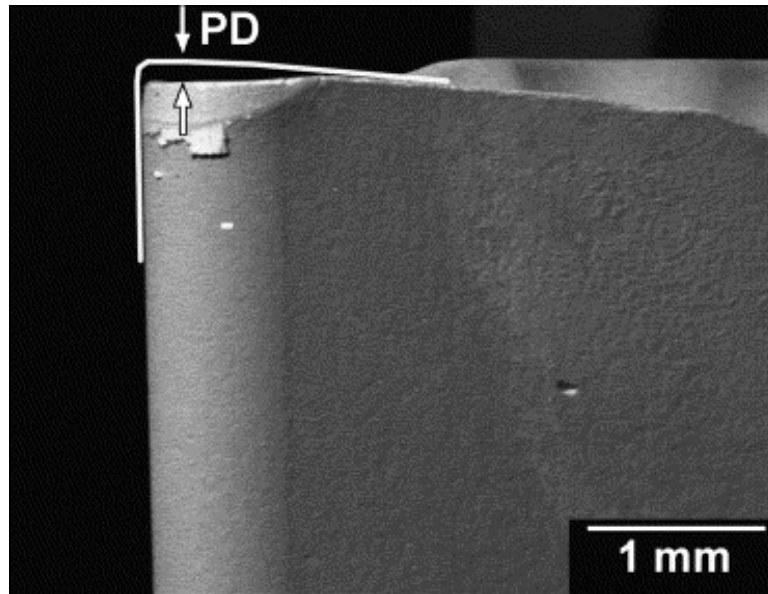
A plastically deformed cutting edge of a turning tool based on WC–Co [4].
